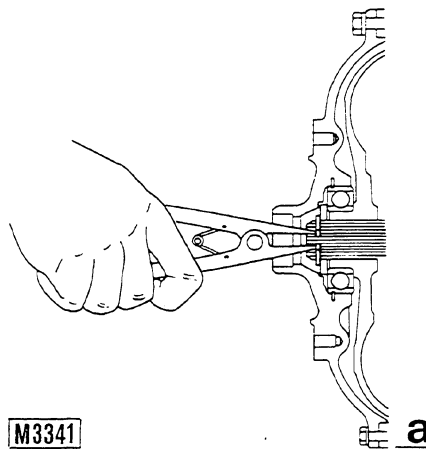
Removing or installing converter cover bearing retaining ring.
